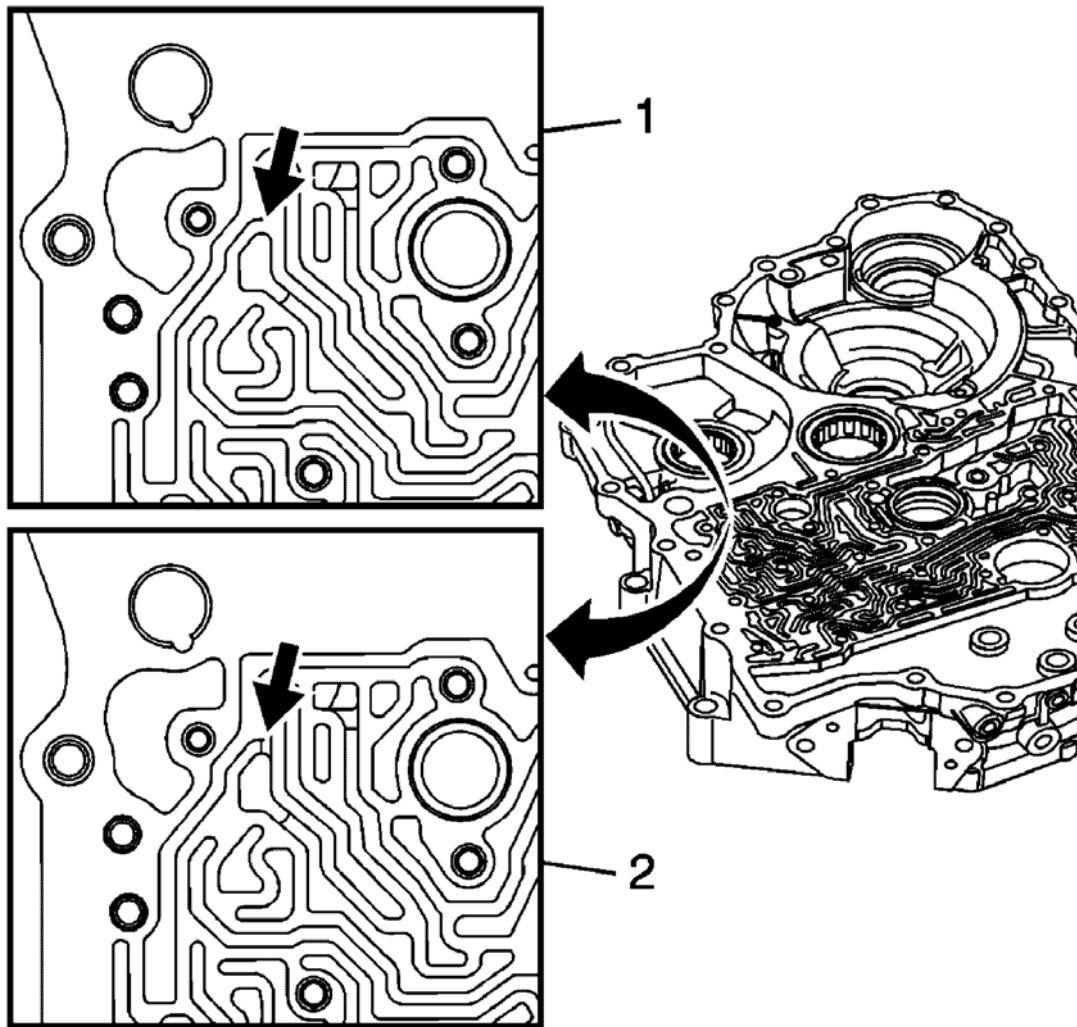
Inspecting The Torque Converter Housing For Correct Lubrication Passage
